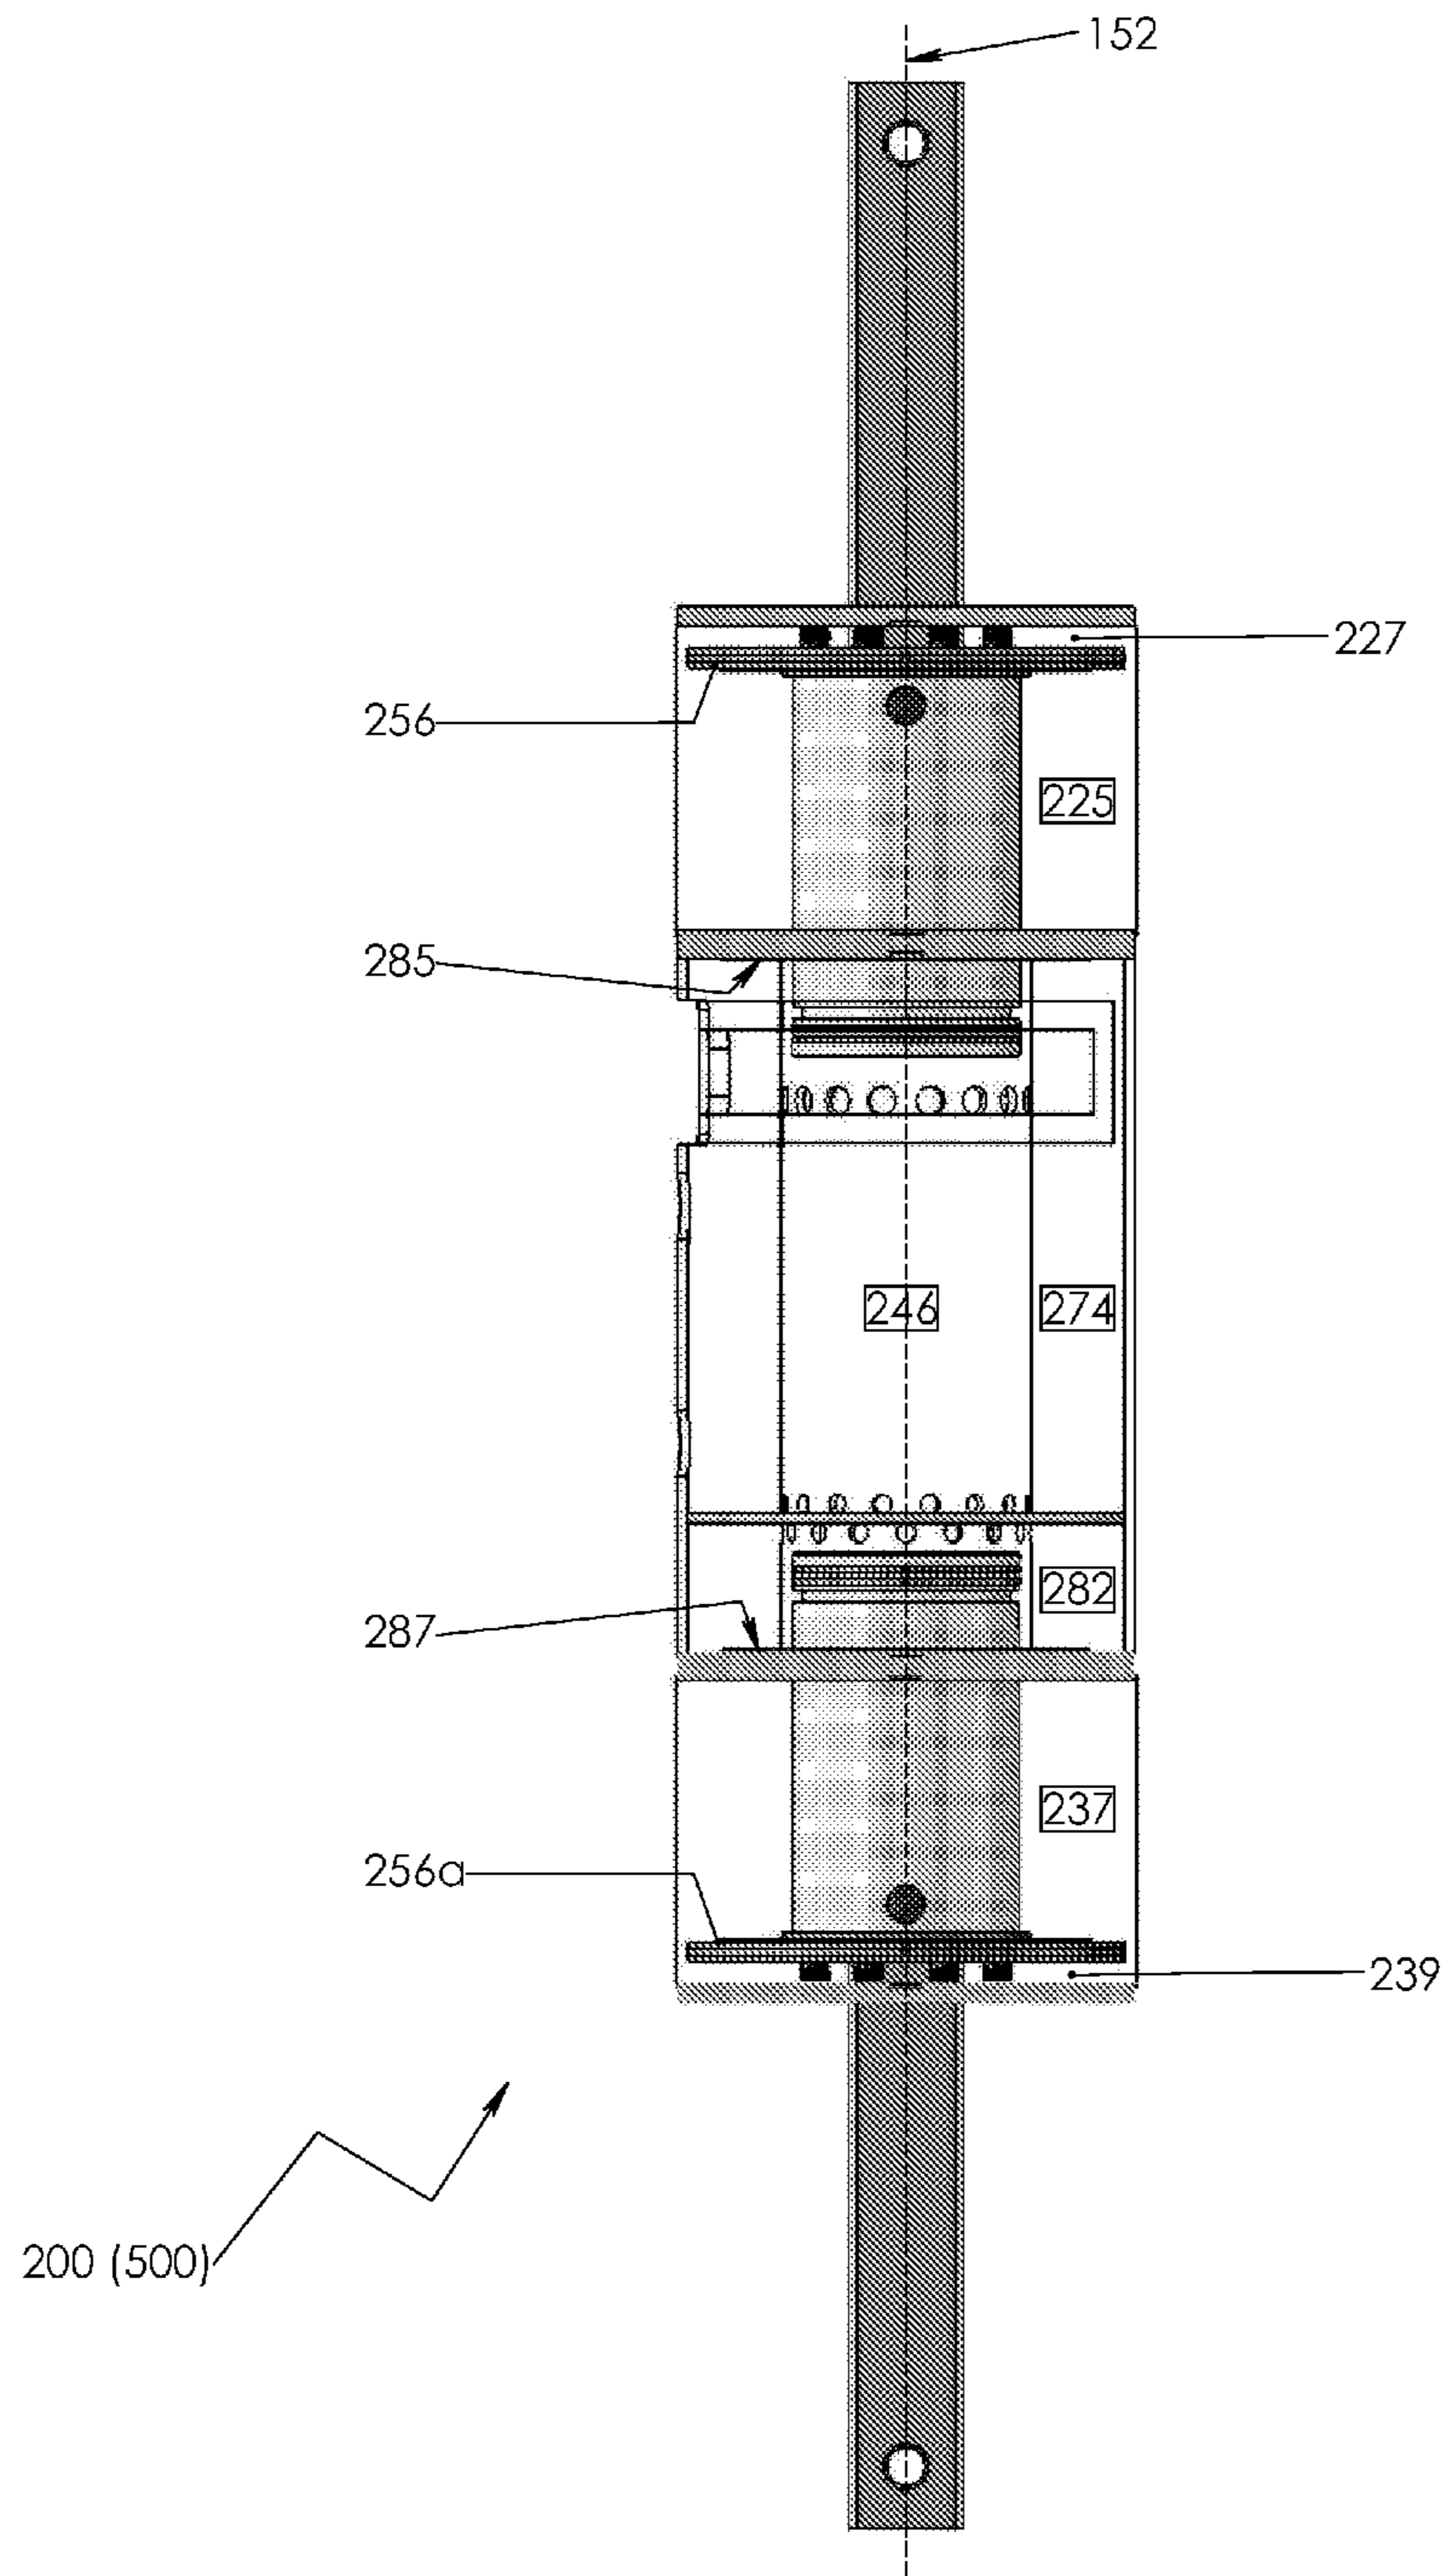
F. SIDE, CROSS-SECTIONAL VIEW OF COMBUSTION ASSEMBLY DURING ENGINE CYCLE
